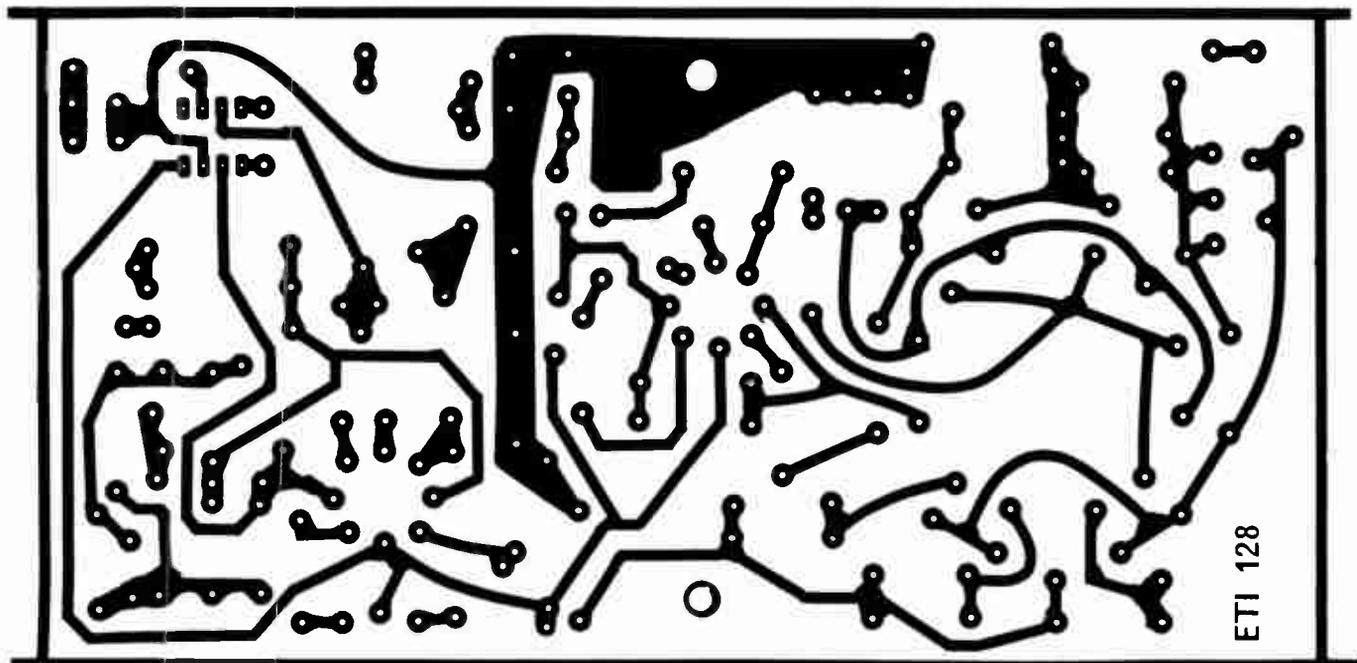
Printed circuit layout. Full size 170 x 87 mm.
